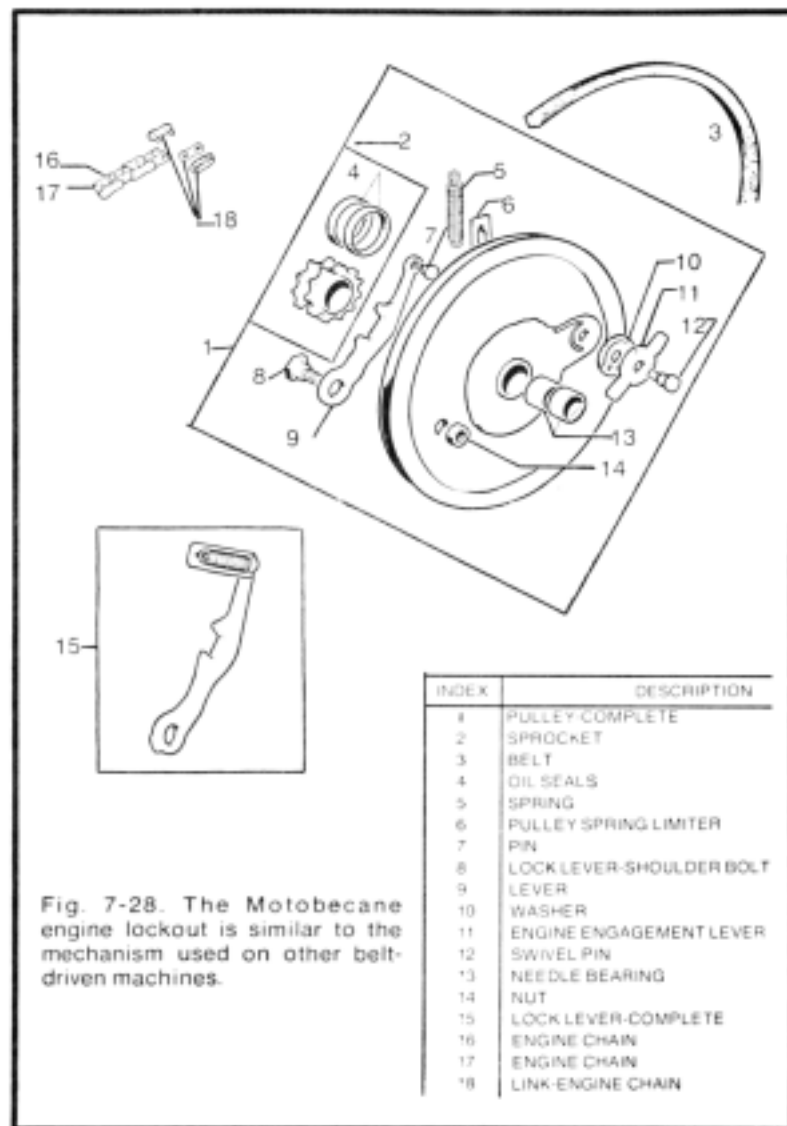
The Motobecane engine lockout is similar to the mechanism used on other belt-driven machines.
